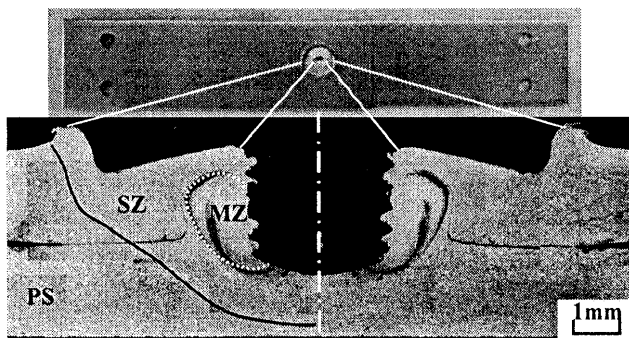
Macroscopic appearance in cross section (as-welded).
